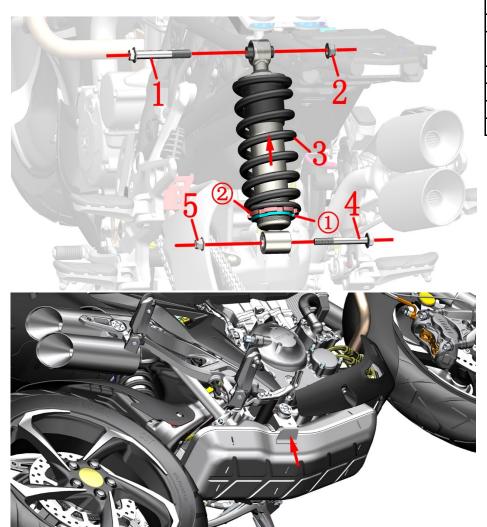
Rear wheel, swinging arm component		Rear shock absorber	CHK
